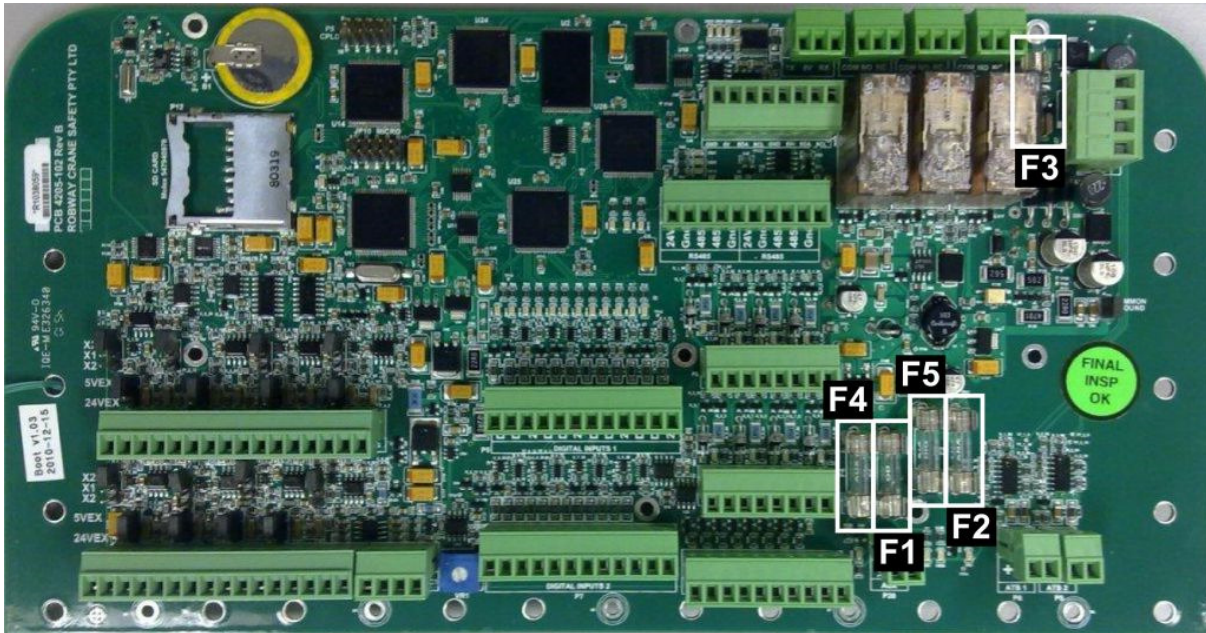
RCI-4100 Controller PCB showing location of Fuses
